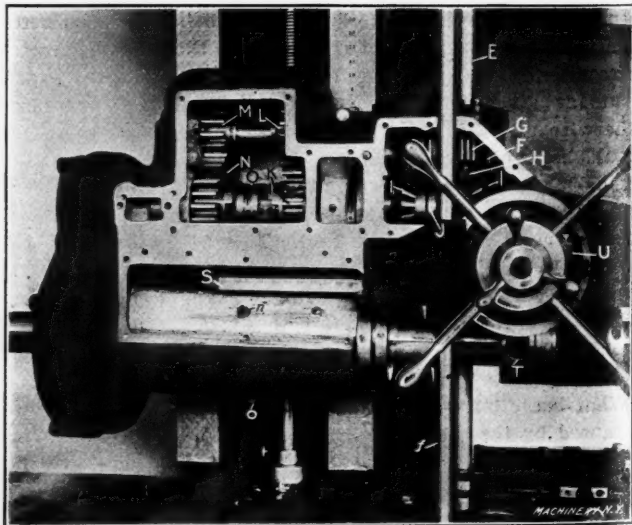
Spindle Head with Plates removed to expose Mechanism
